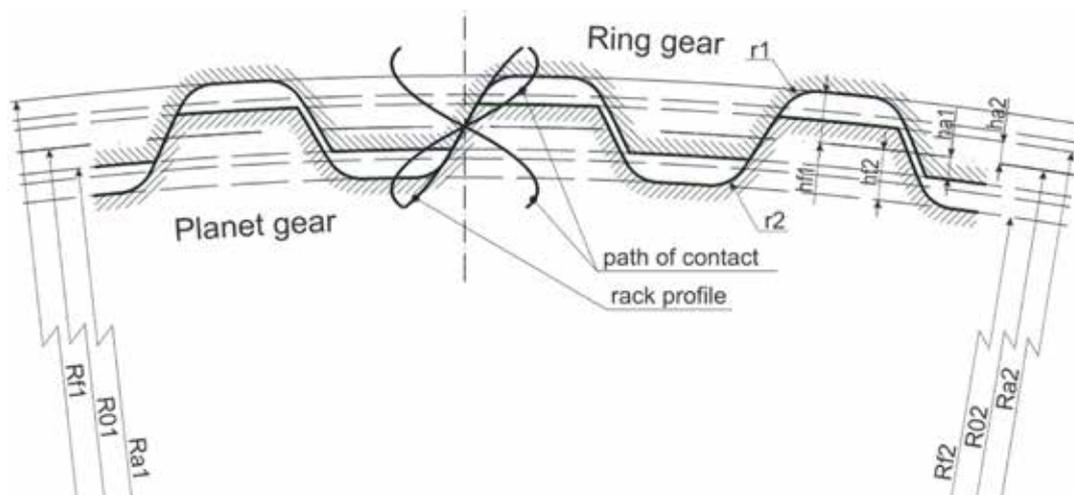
S-gear flank geometry of the planocentric gear box [15].
